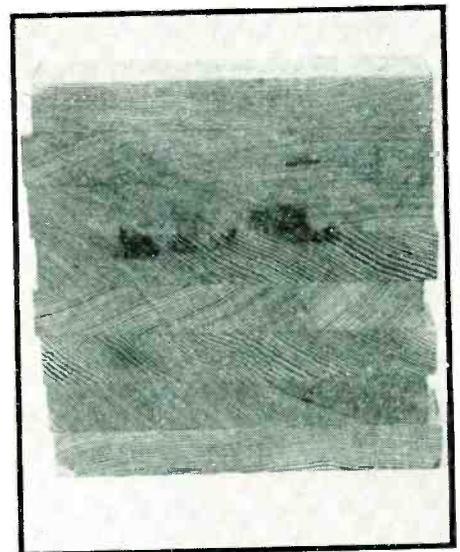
Piece cut from the end of the 6 in x 6 in. x 16½-ft block from which the multi-laminar spar is cut
